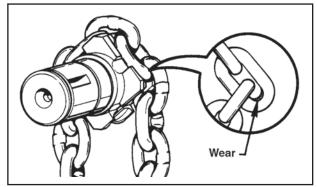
Check Chain Wear at Bearing Surfaces Between Links
